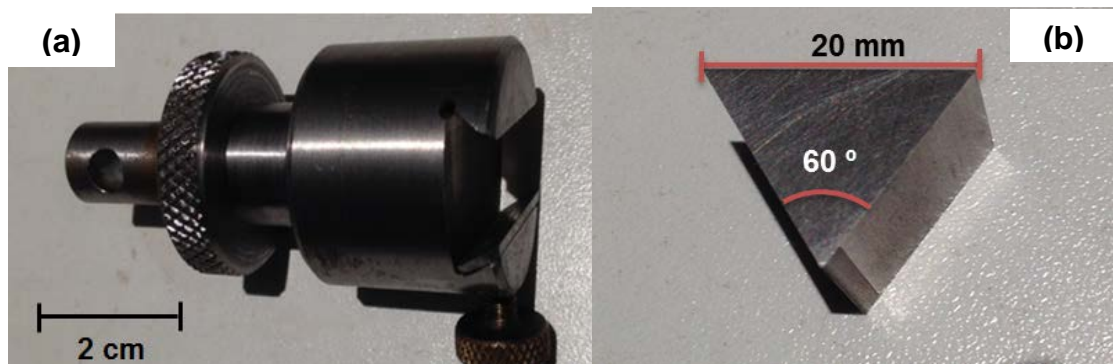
(a) Connection fixture (indenter holder) and (b) wedge indenter and its dimensions.
